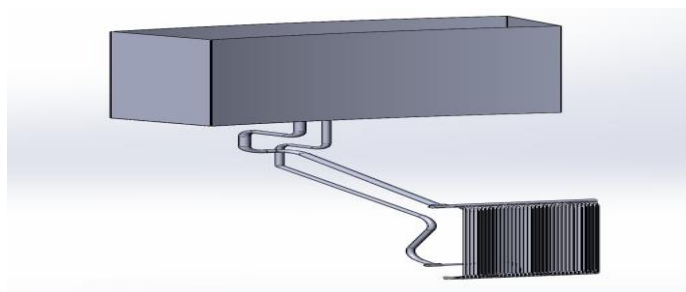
3D Model of Passive Heat Removal System Equipment
